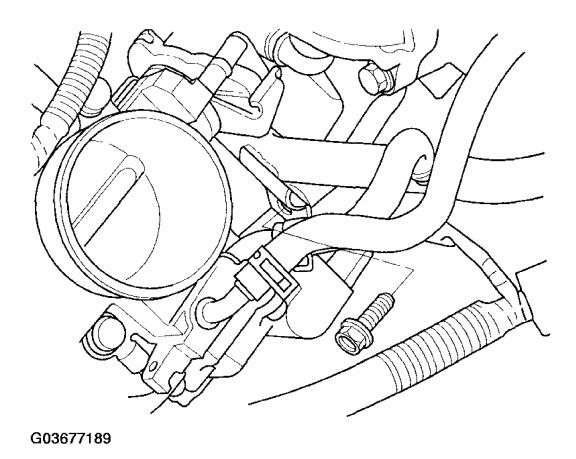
Removing Bolt Securing Connecting Pipe Support Bracket To Engine Block
